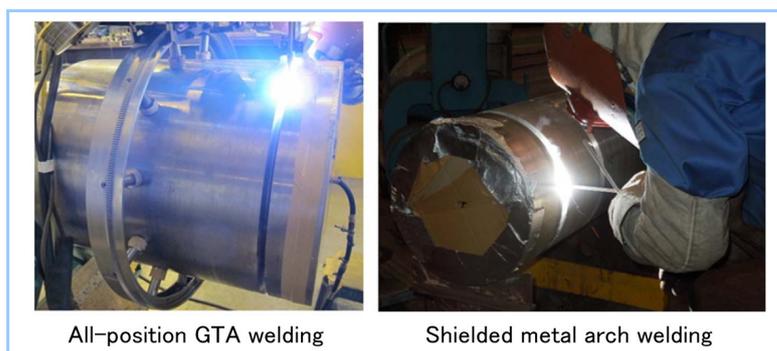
Welding of the HR6W large-diameter pipes
